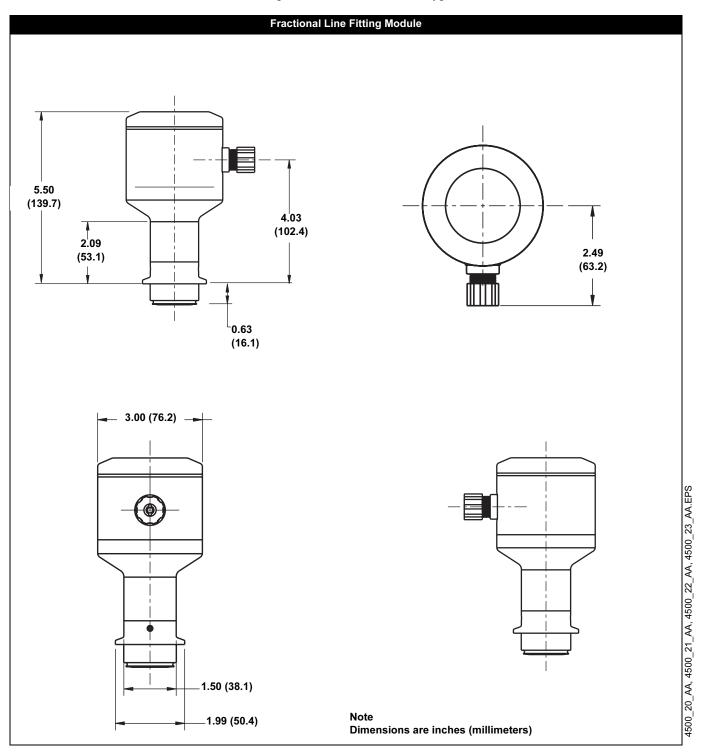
Dimensional Drawings for the Rosemount 4500 Hygienic Pressure Transmitter
